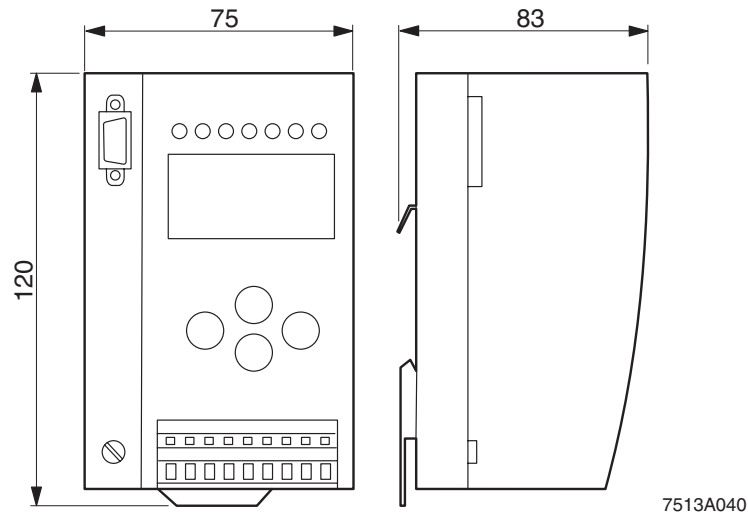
Housing dimensions of the FLX ASI MA 2 PB EF master in mm
